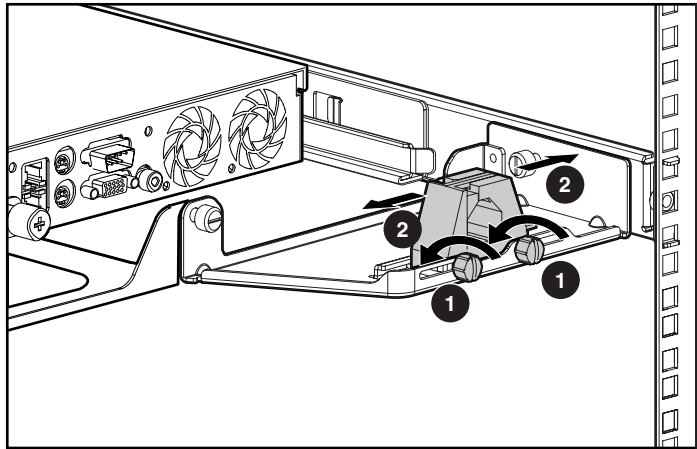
Opening the cable clamp (cables removed for clarity)
